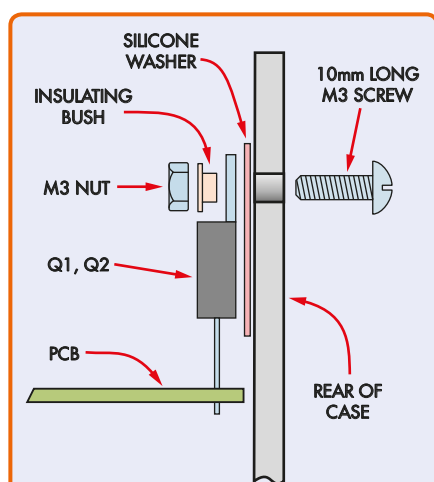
the mounting details for MOSFETs Q1 and Q2. The metal tab of each device must be isolated from the case using an insulating bush and a silicone washer.
